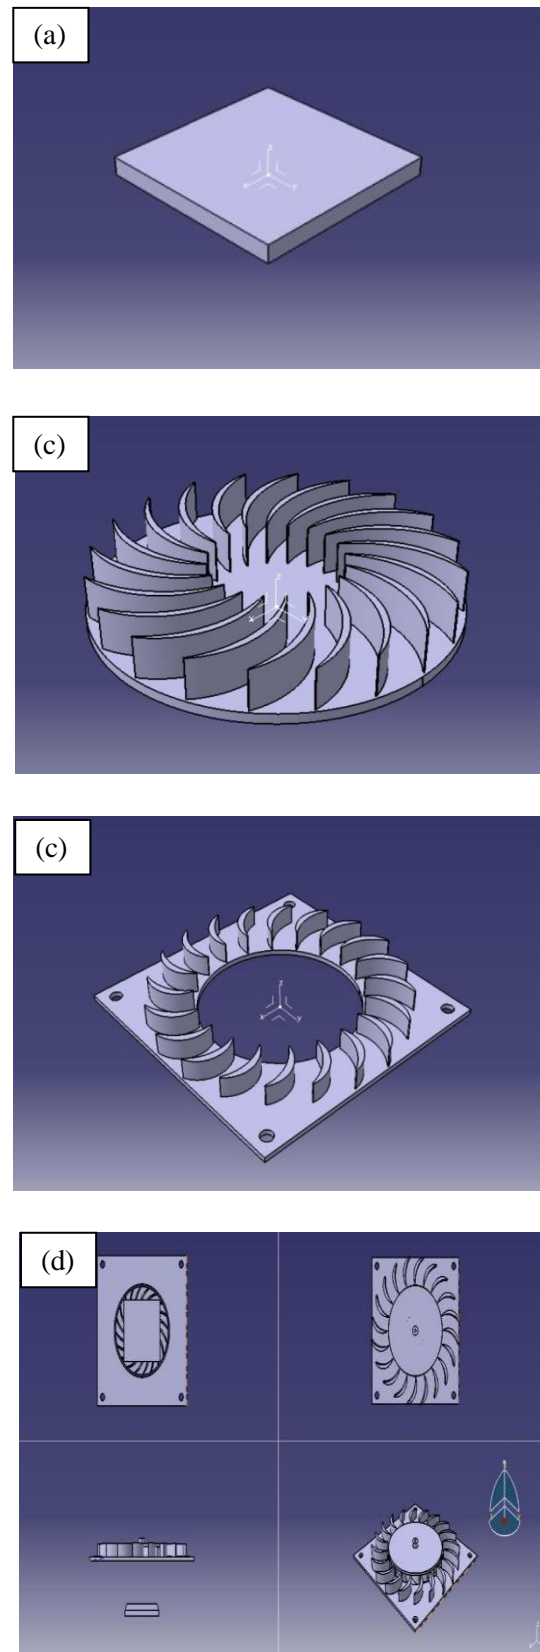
(a)-(b); Models of Processor, stator, rotor and assemblage of stator and rotor
